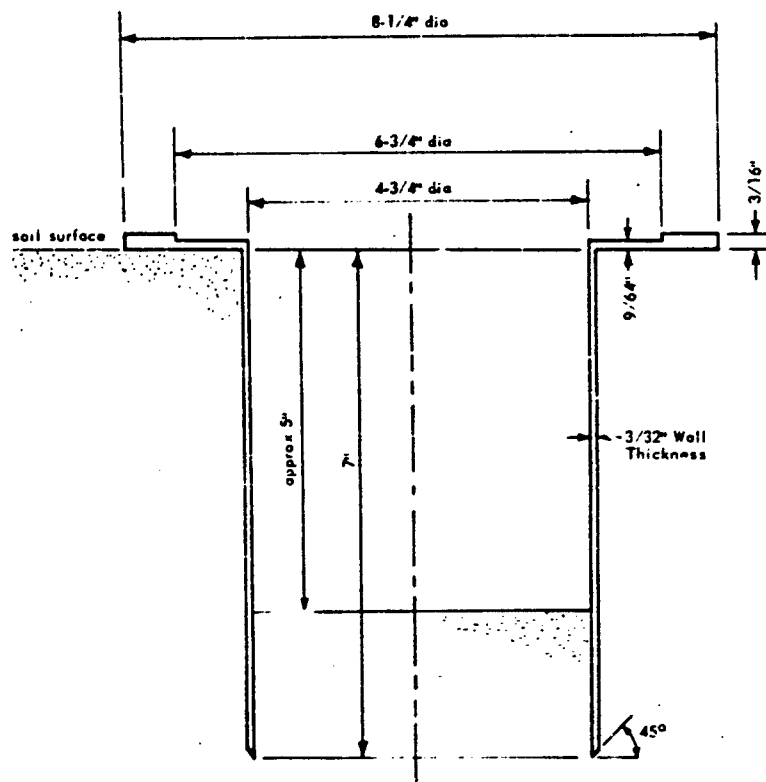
Cross section of cylindrical wall support device used for sand-cone method of density determination in dry sand.
